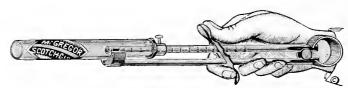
CHESTERTON GAGE GLASS CUTTER.
